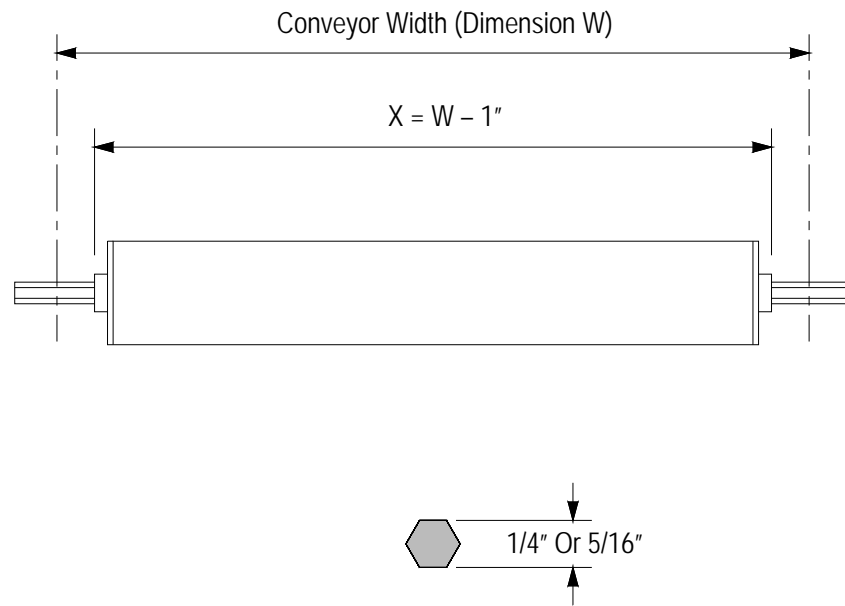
Roller & Axle Size – 1 1/2" & 3" Roller Centers
